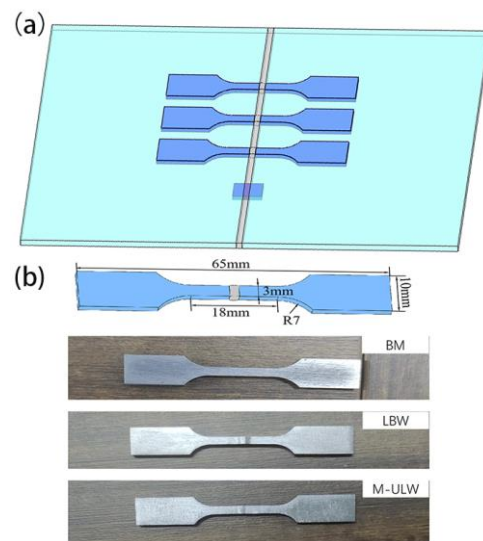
Schematic of samples used for tensile testing: (a) sampling location; (b) tensile specimen size.
